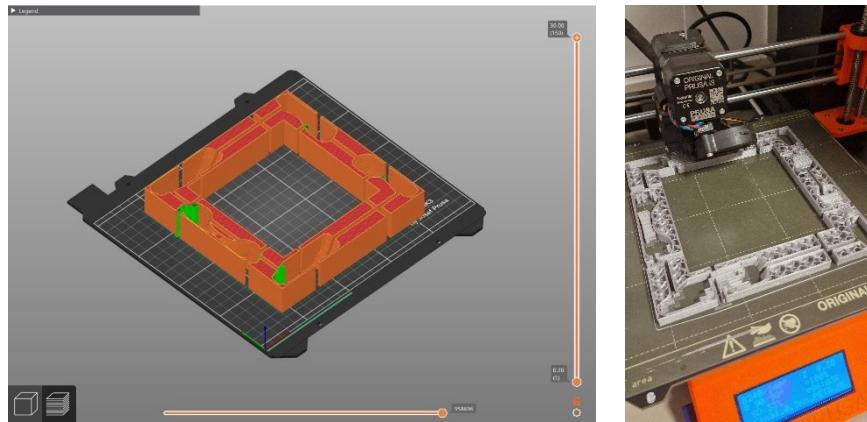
(left) The designed mold with the vertical and horizontal cutouts; (right) The first layer of the mold
